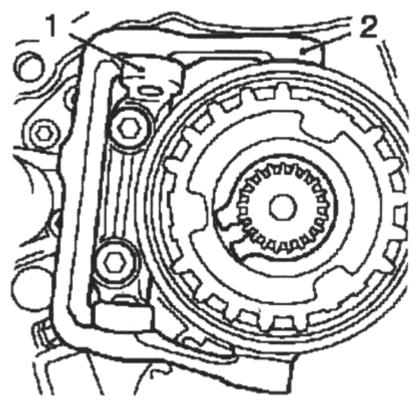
Withdrawal support bearing with Rocker with back cover:
